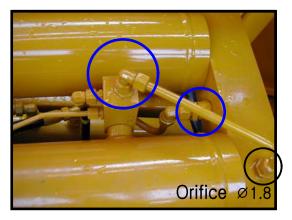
Check valve #1 (Orifice : PF1/2" X 12L X  $\varnothing$ 1.8)
